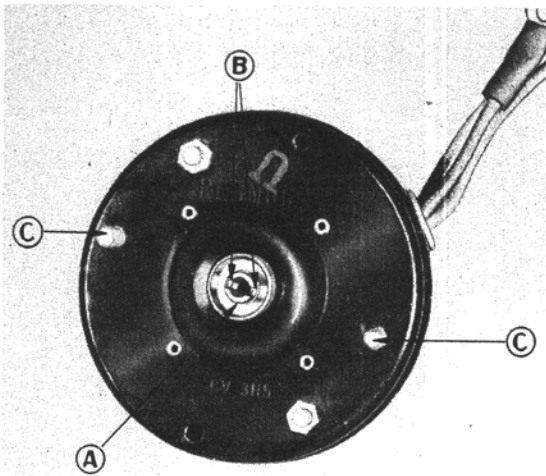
End View of Motor with Cup Installed on Drive Shaft
